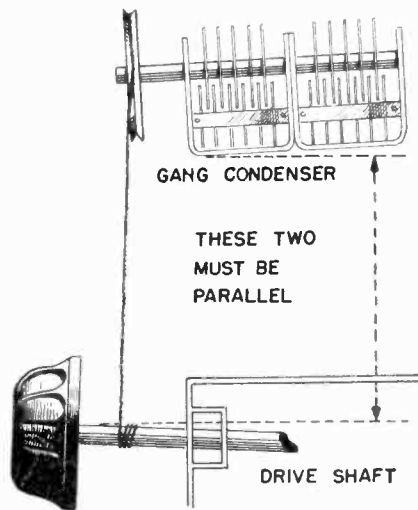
As illustrated above, the axes of all shafts in a dial assembly must be parallel for proper operation.
